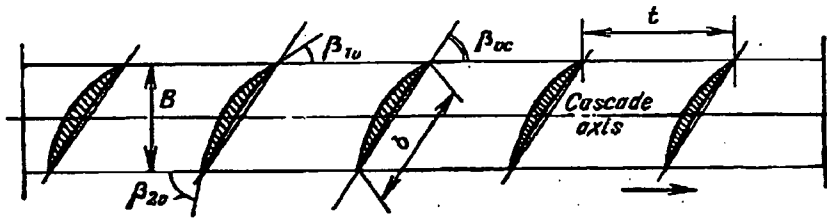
Axial-flow machine. Vane cascade developed onto plane
